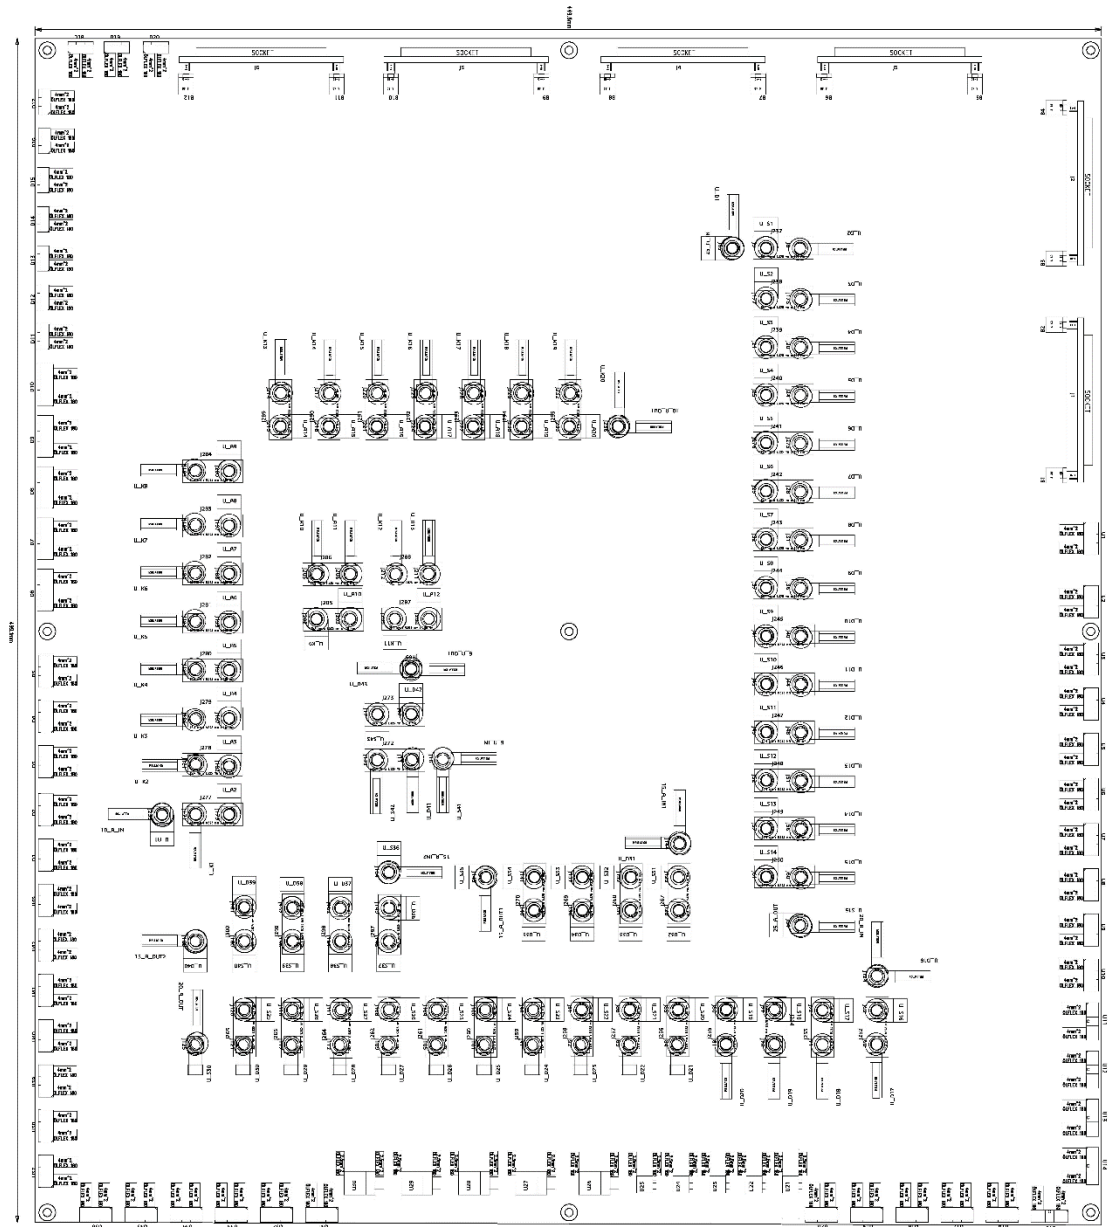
Semiconductor Measurement Board Assembly diagram. PCB size 450 mm x 500 mm
